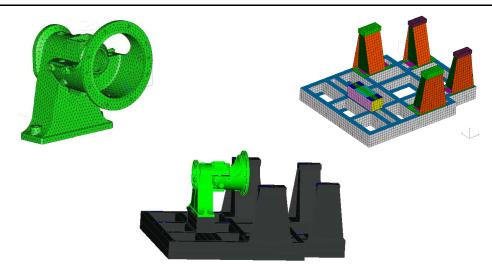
Bearing support and frame CAD models, two-component pump assembly
